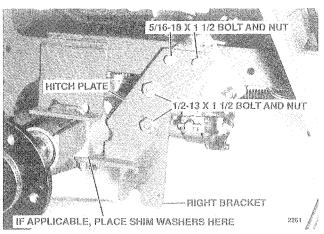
Right Rear Hitch Plate - Hydrostatic
